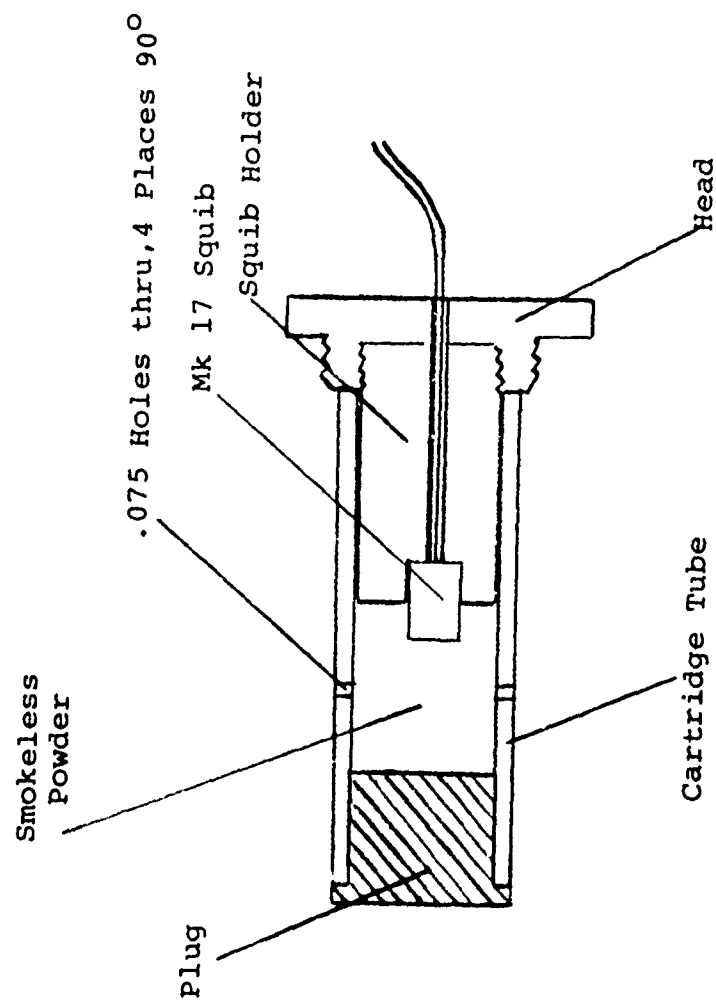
DEPLOYMENT CHARGE ASSEMBLY
